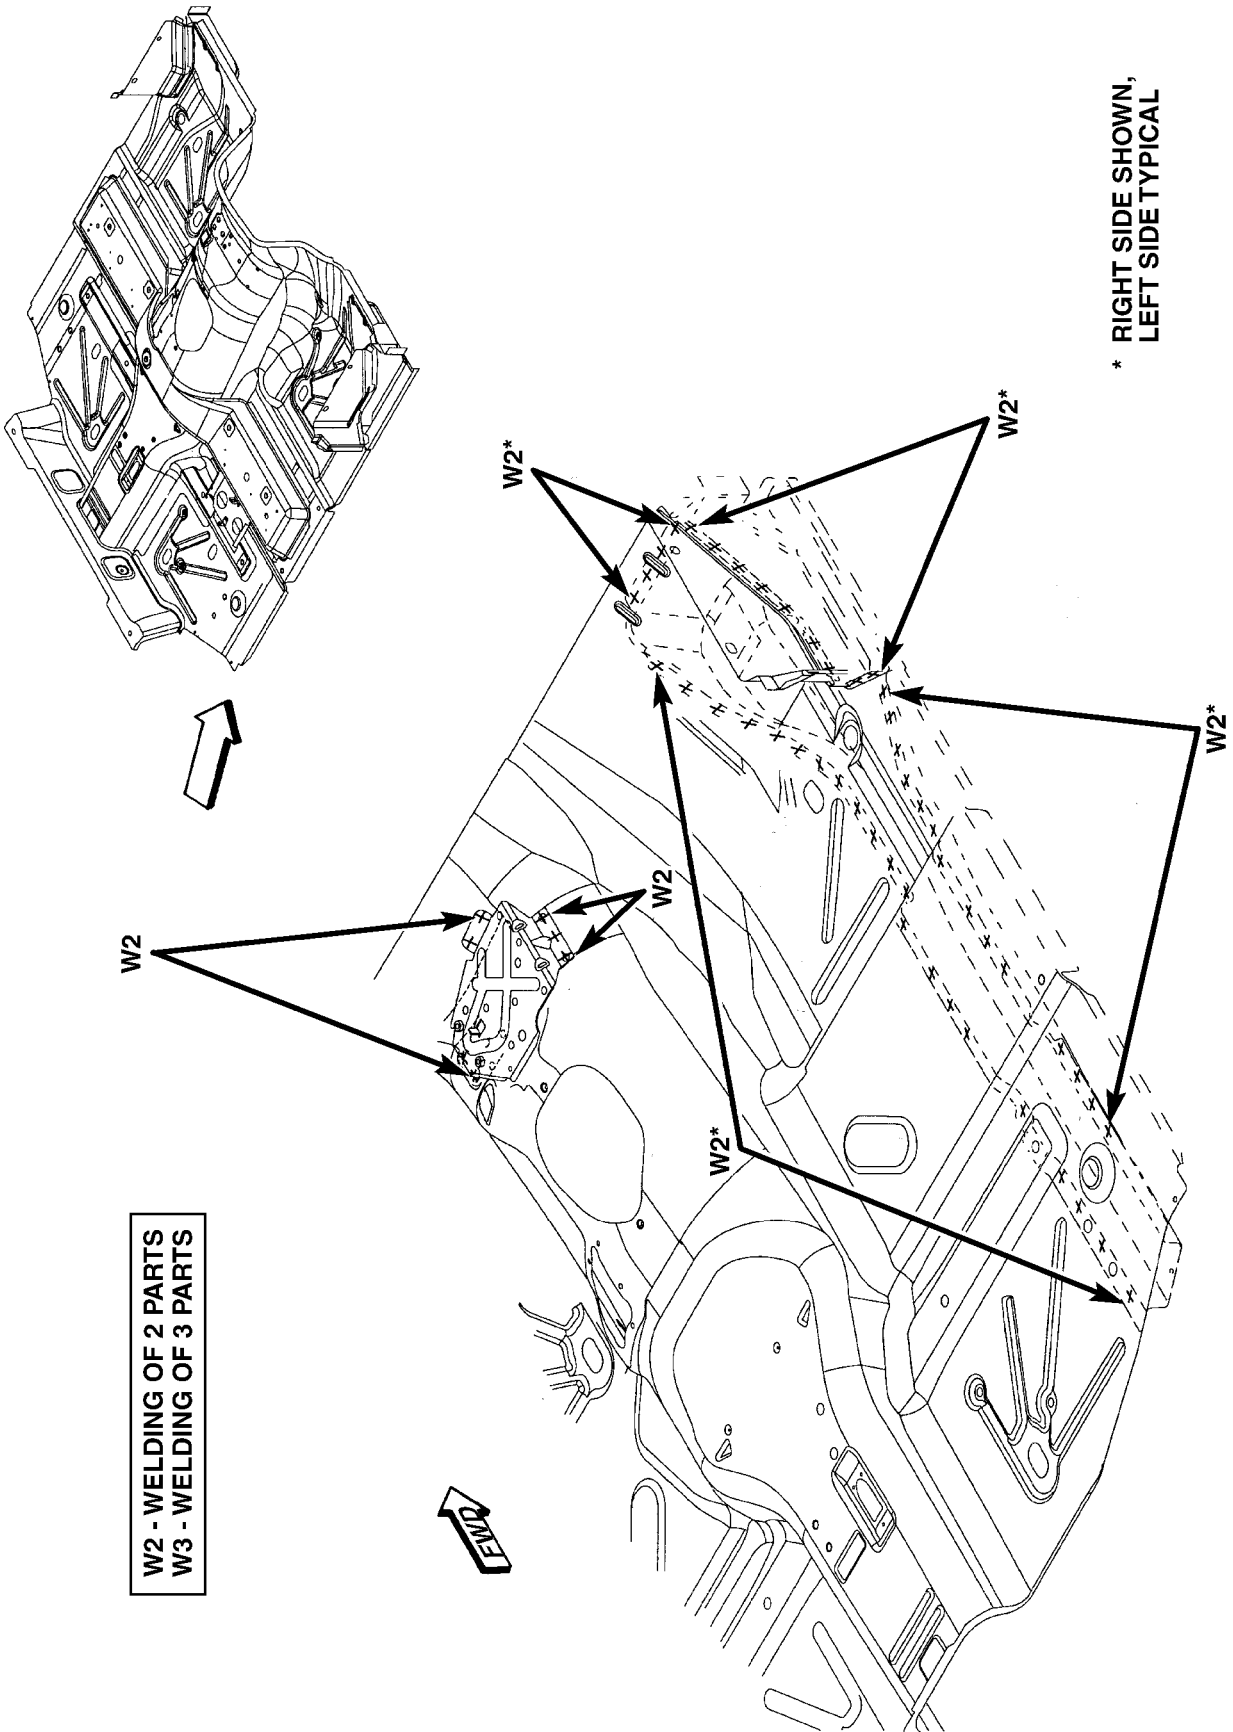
FRONT FLOOR PAN (1 OF 3)
